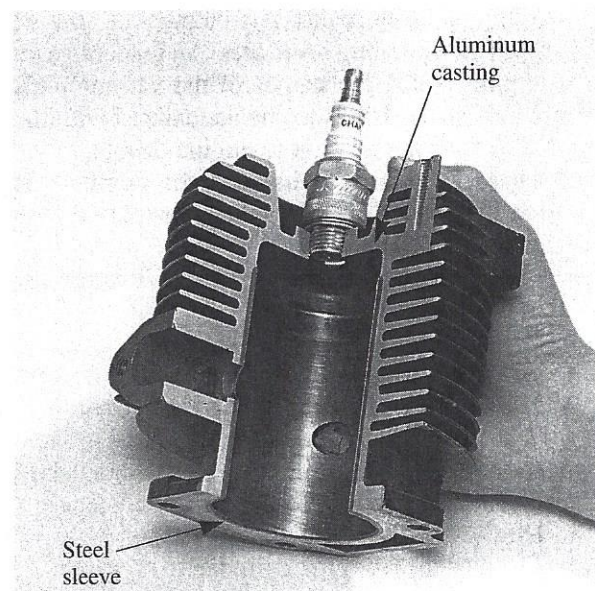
An aluminum cylinder block die cast around a steel sleeve. Note fins for air cooling.
